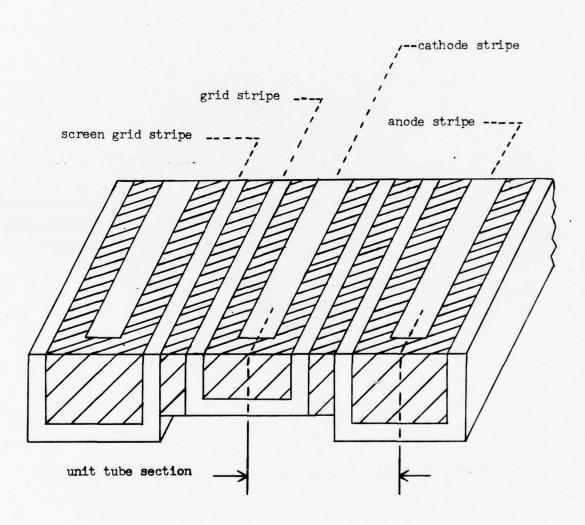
Trough Strip Line Tube Showing Two Tube Sections
